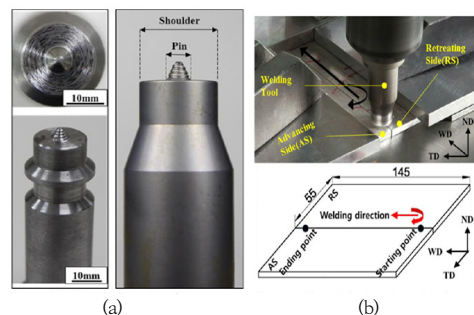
(a) Tool shape and (b) Schematic of friction stir welding[2]
